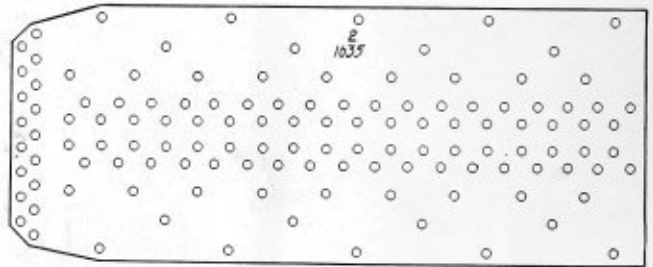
Inside Welt Strip For A Decuple Riveted Seam- Drilled And Edges Finished-Ready To Be Rolled
